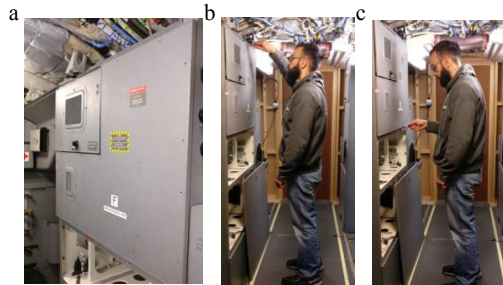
Task 4: Avionics Rack Cover (a) Location (b) Posture of Operator for Upper Fasteners and (c) Lower Fasteners
